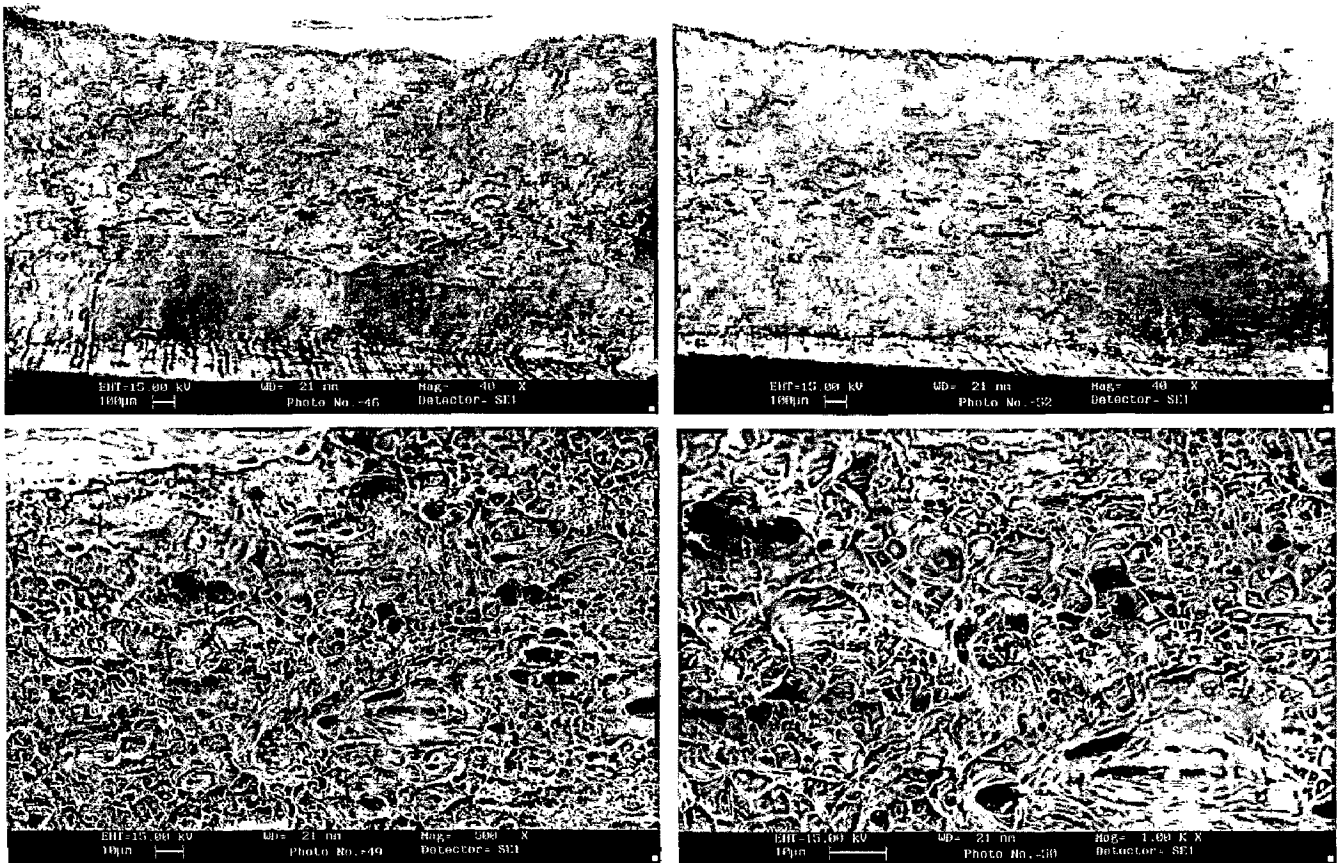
SEM fractographs for tensile specimen for EBW welded AISI 4140 and AISI 304
